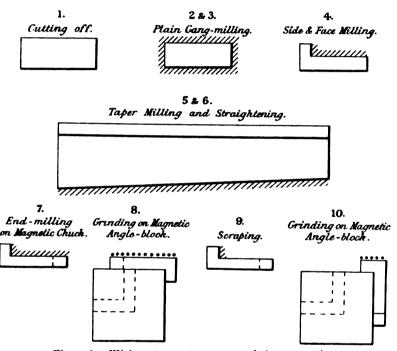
Wicks rotary typecaster; angle-base operations. Scale: full size.
